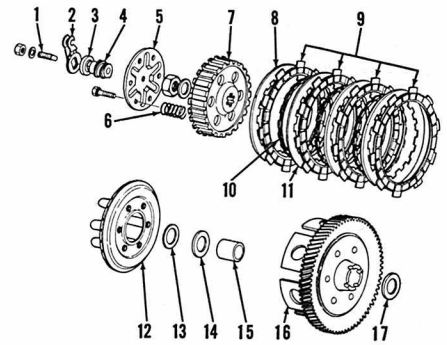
Exploded view of clutch used on 100cc models. Refer to Fig. Y3-17 for 125cc models.
